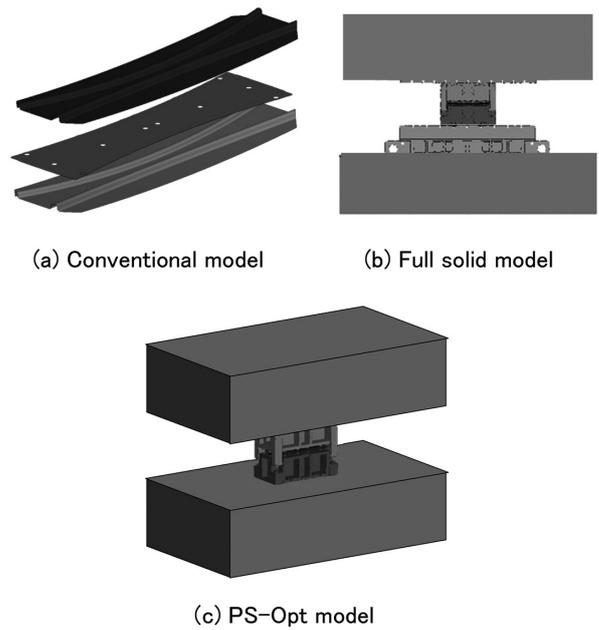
Schematic drawings of conventional and analysis considering the deflection model
